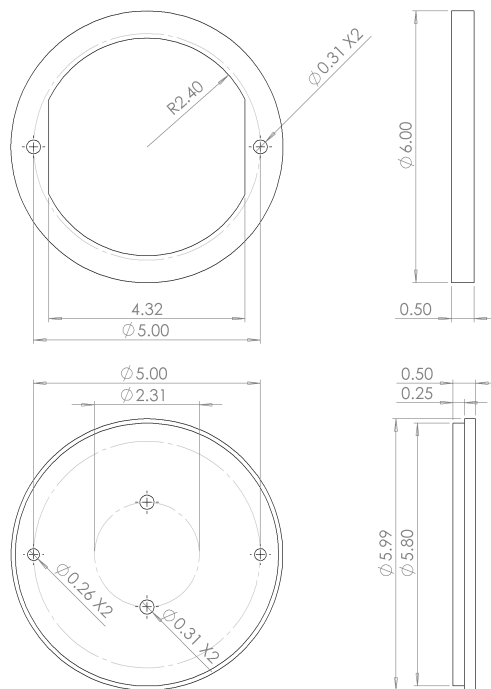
Nose Cone/Payload Bay bulkheads dimensional drawings (in.)
